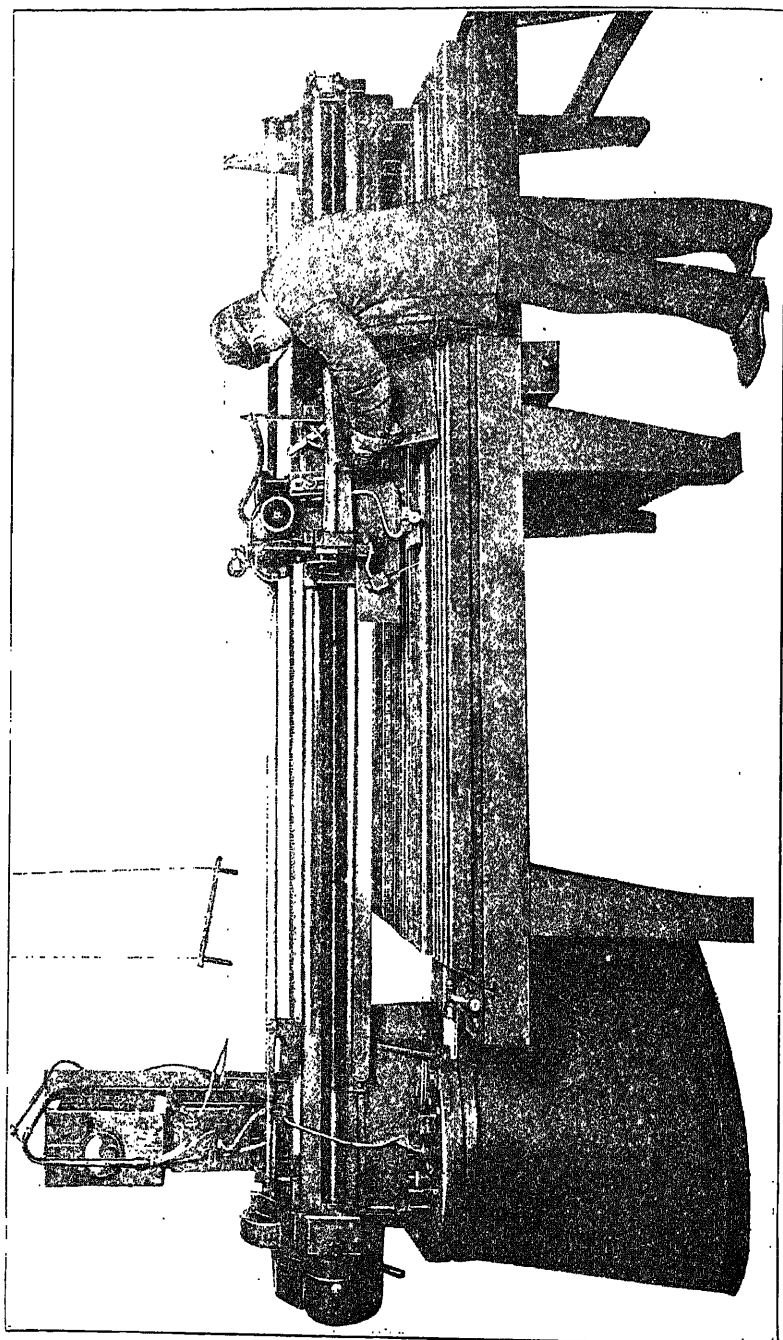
Carbon Electrode Arc Seam-Welding Machine.
